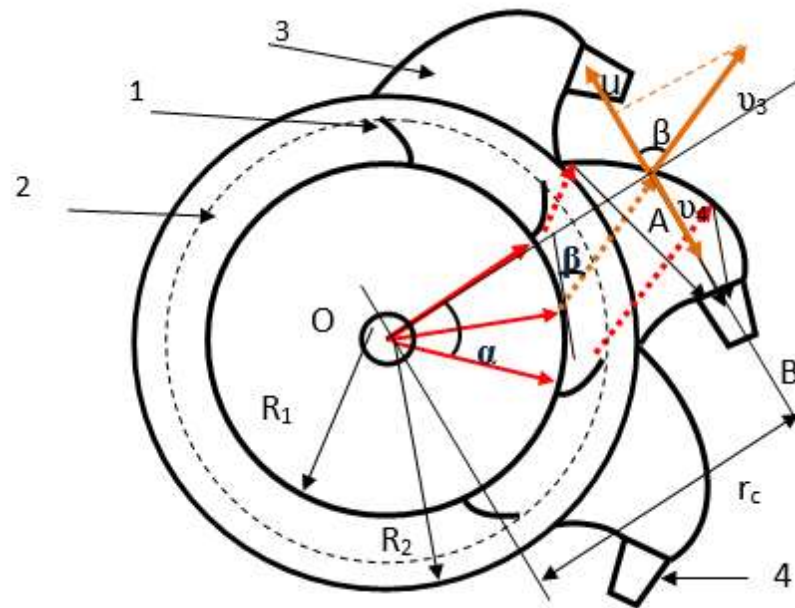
Top view of the horizontal section of the jet nozzle hydraulic turbine impeller [6]
